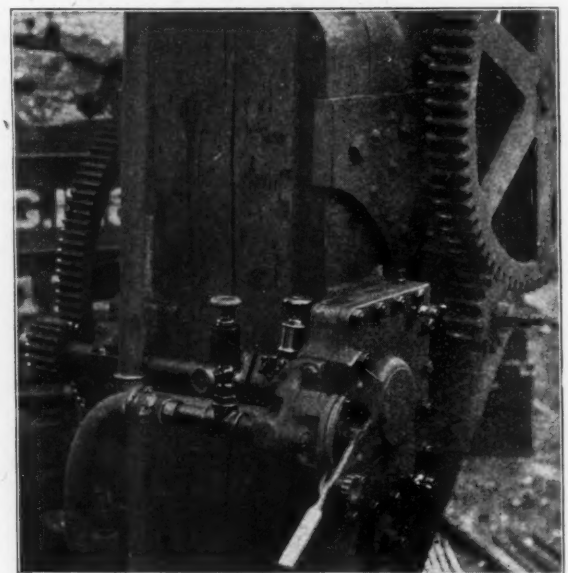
VIEW SHOWING APPLICATION OF THE DAKE AIR MOTOR TO A HAND CRANE.
